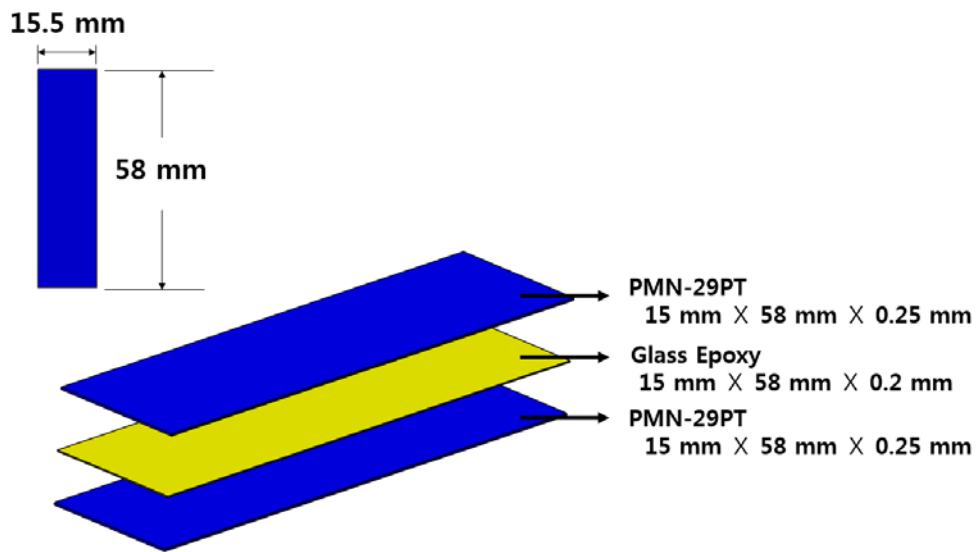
Lay-up and dimensions of the bimorph actuator
